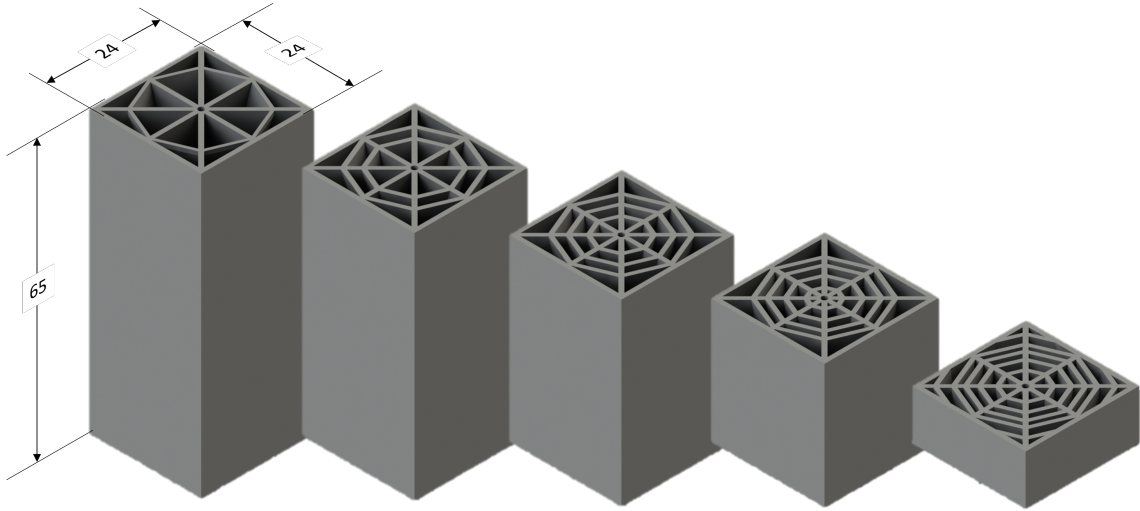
Dimensions (mm) and cross-section views of the spider web inspired EAS.
